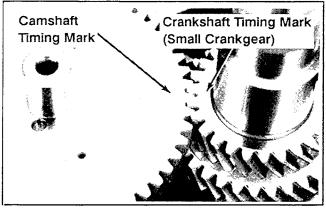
Aligning Timing Marks On Crankgear And Camgear.
